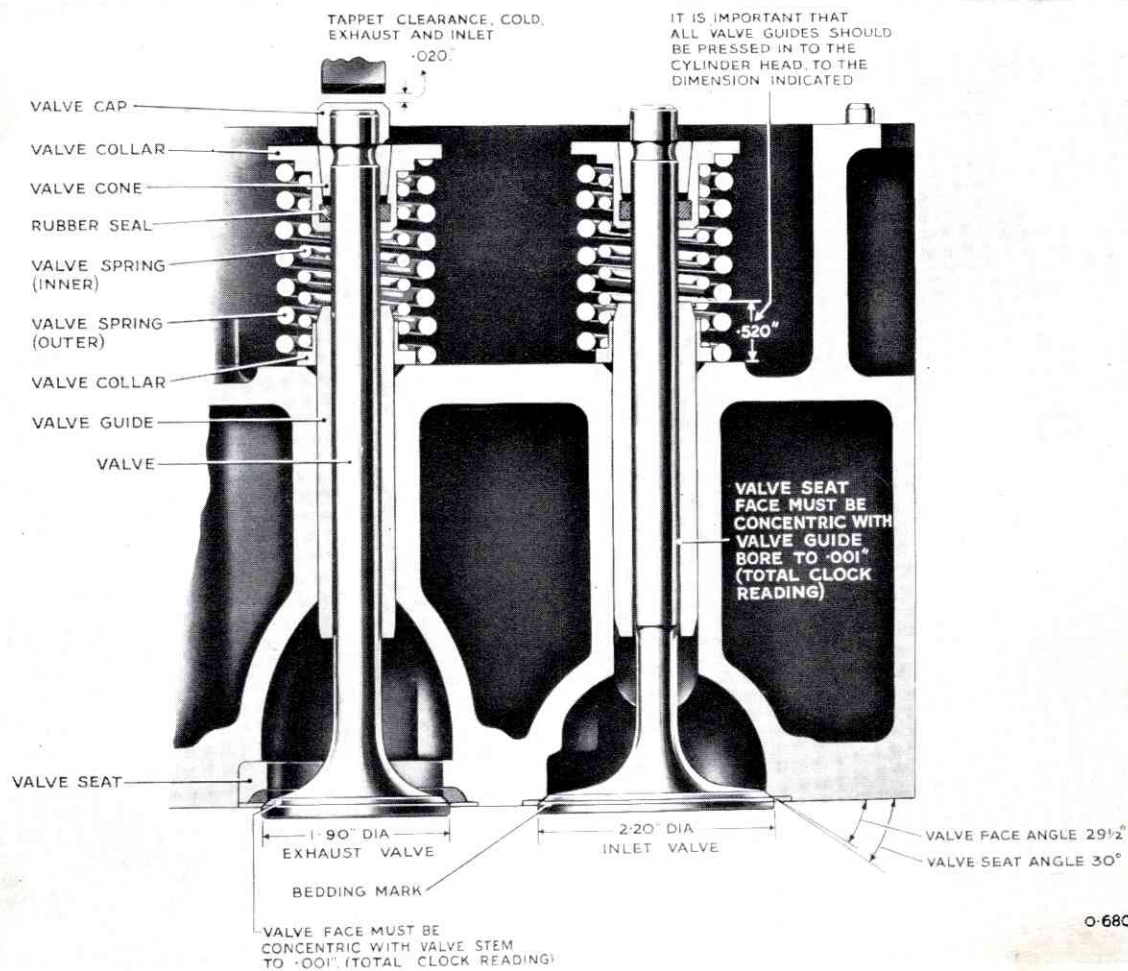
VALVES SPRINGS AND VALVE SEATS IN POSITION ON 0680 ENGINE
